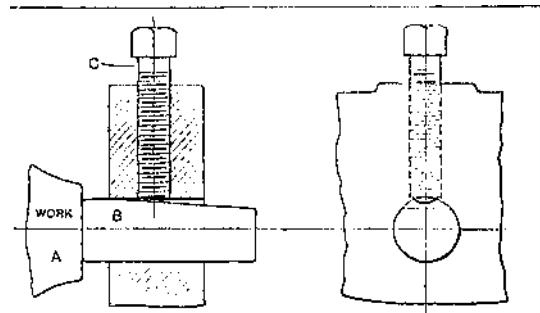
Adjustable Locating Point consisting of a Flattened Stud held in Place by a Set-screw
